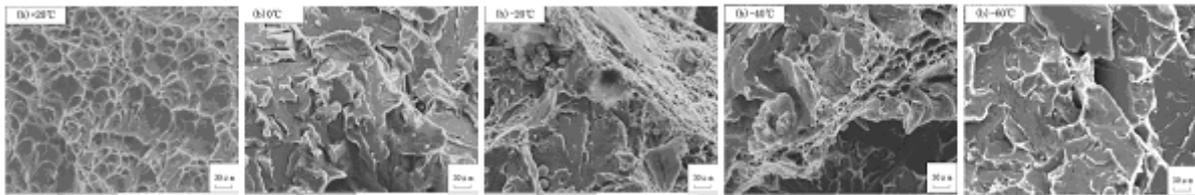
Micro-morphology of Fracture Surfaces for Weld Metal of 460Mpa Steel at Five Different Temperatures
